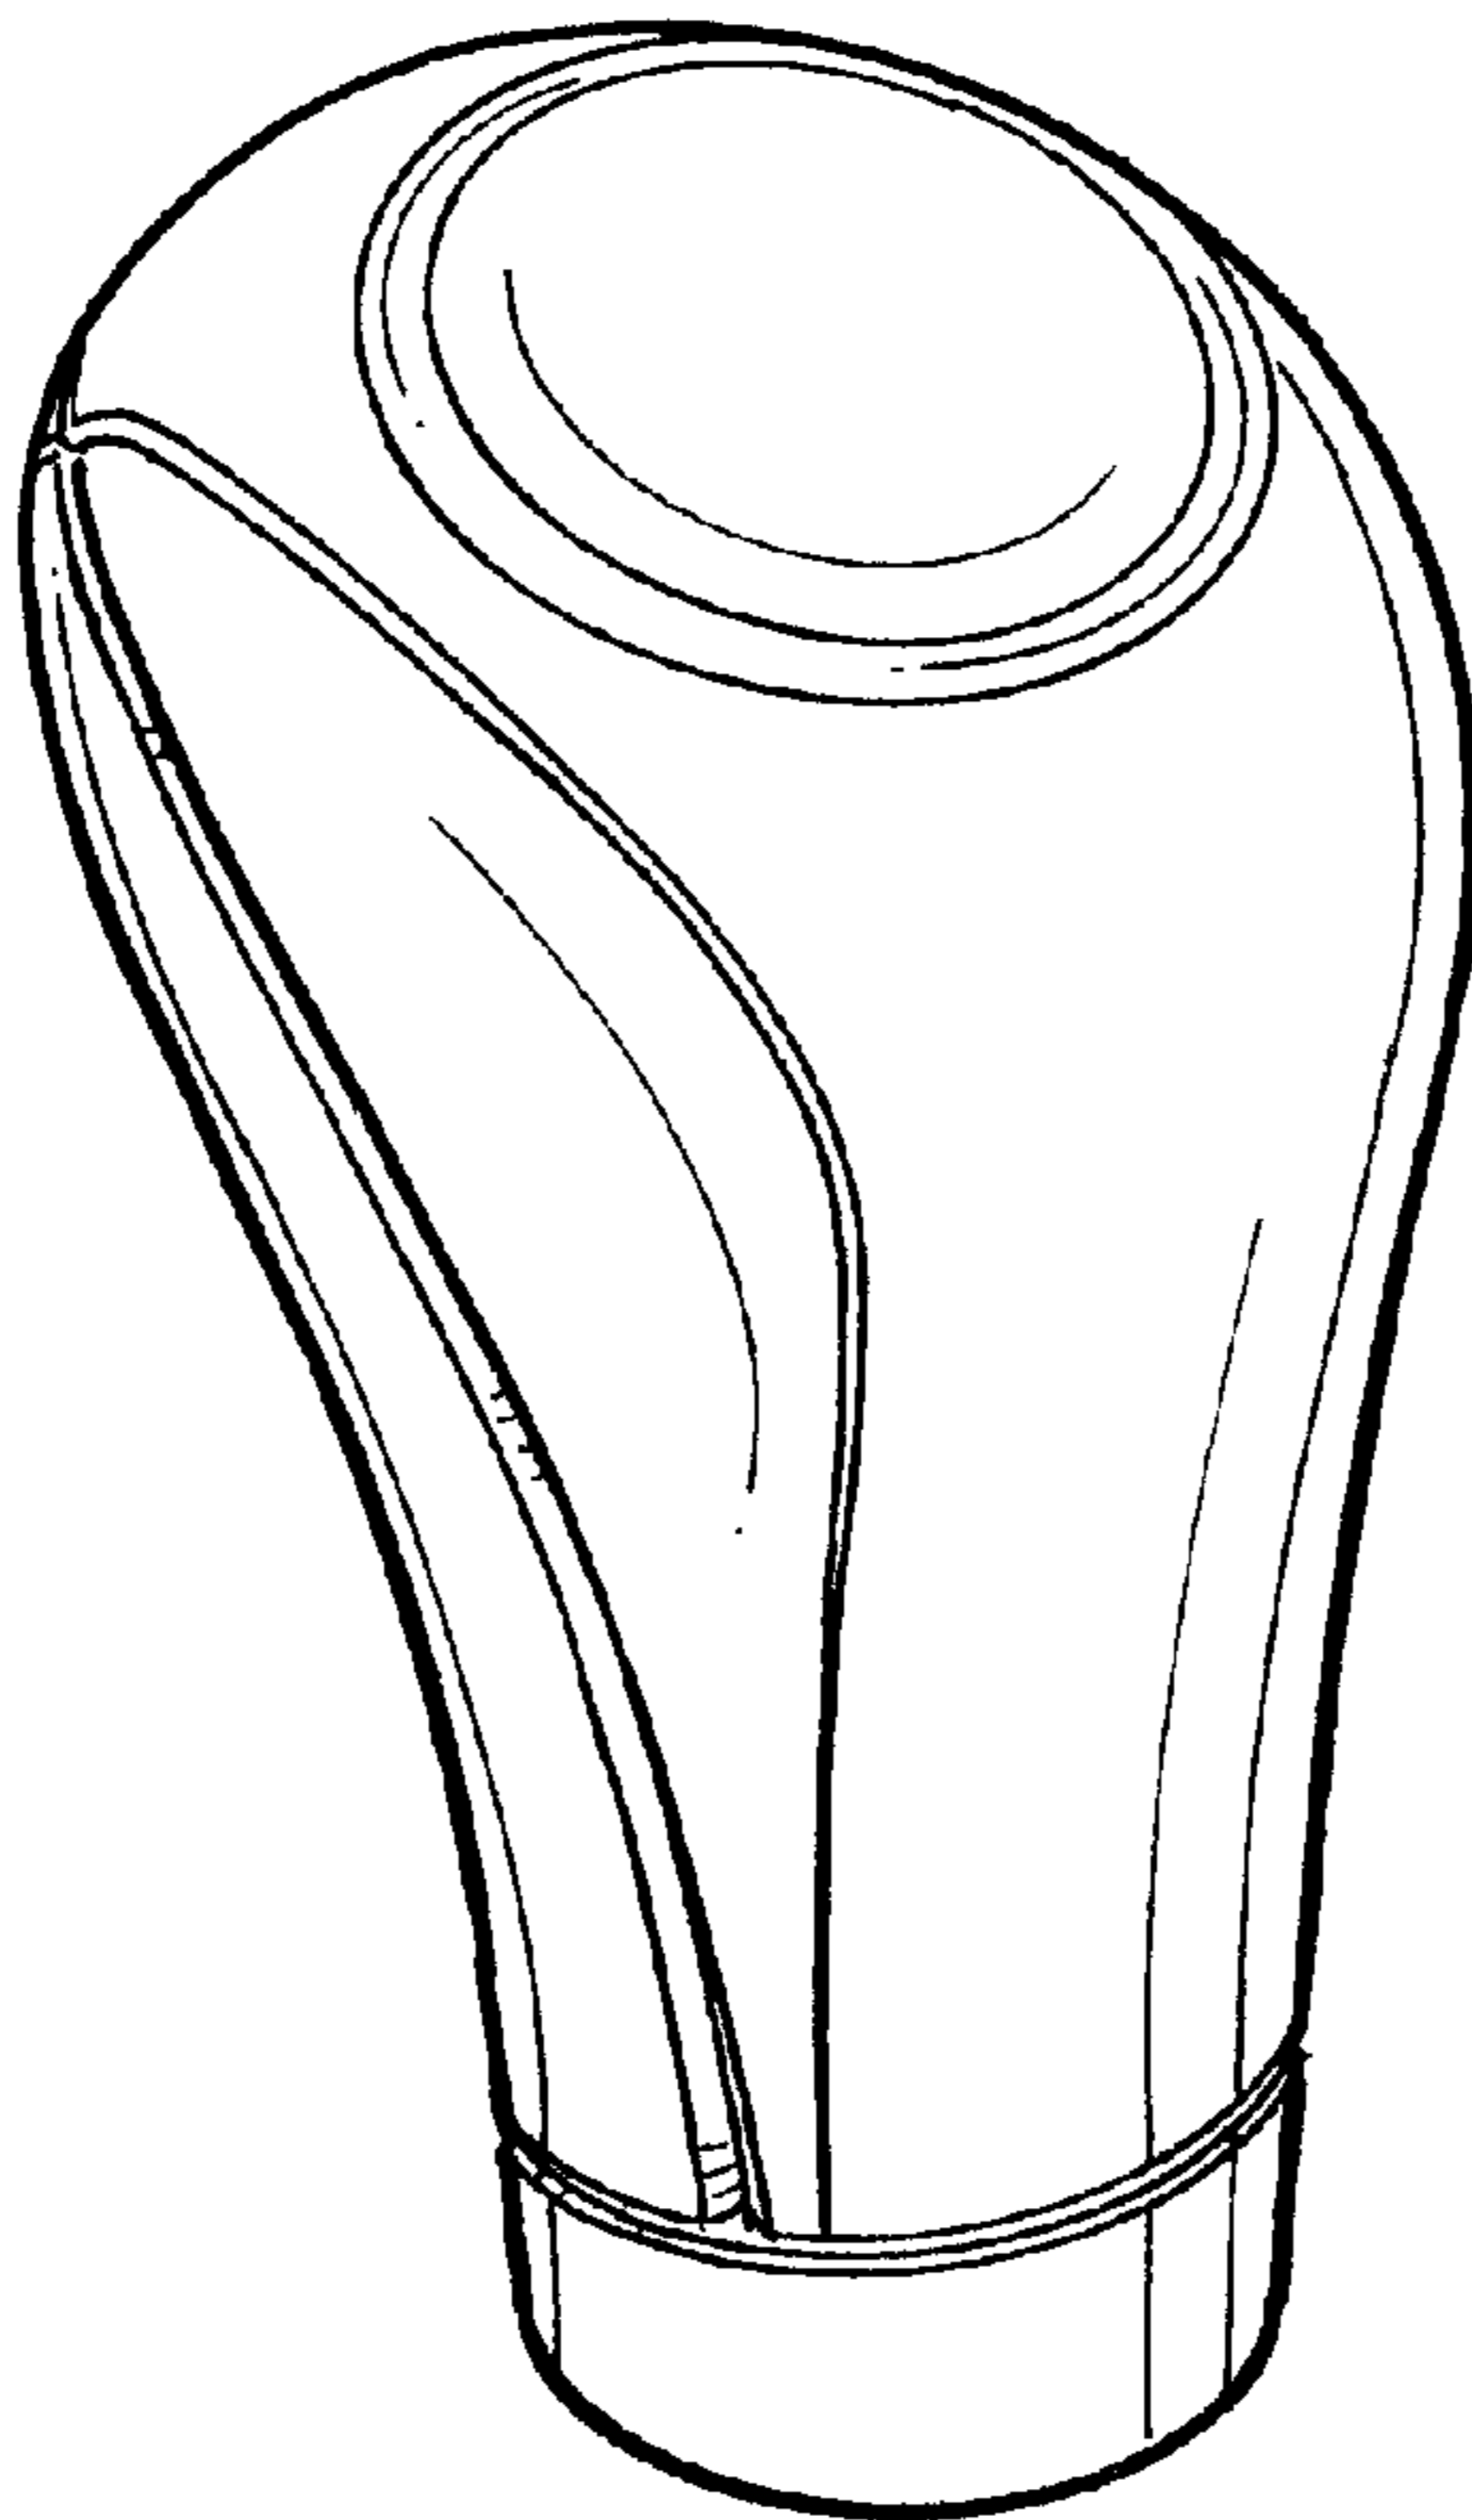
is a front, left perspective view of a surface configuration of a gearshift knob for a vehicle according to our novel design, the right, front perspective view being mirror symmetrical;
